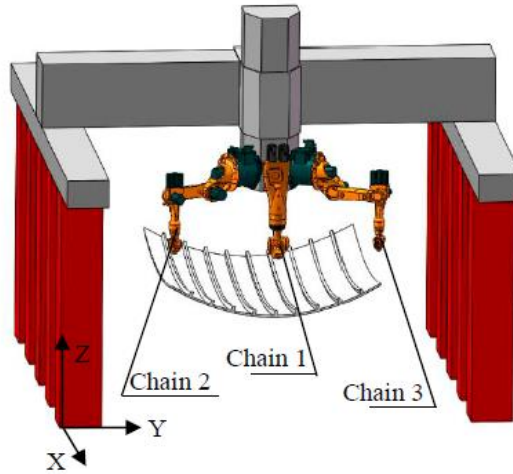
Liu et.al collaborative welding platform [58].
